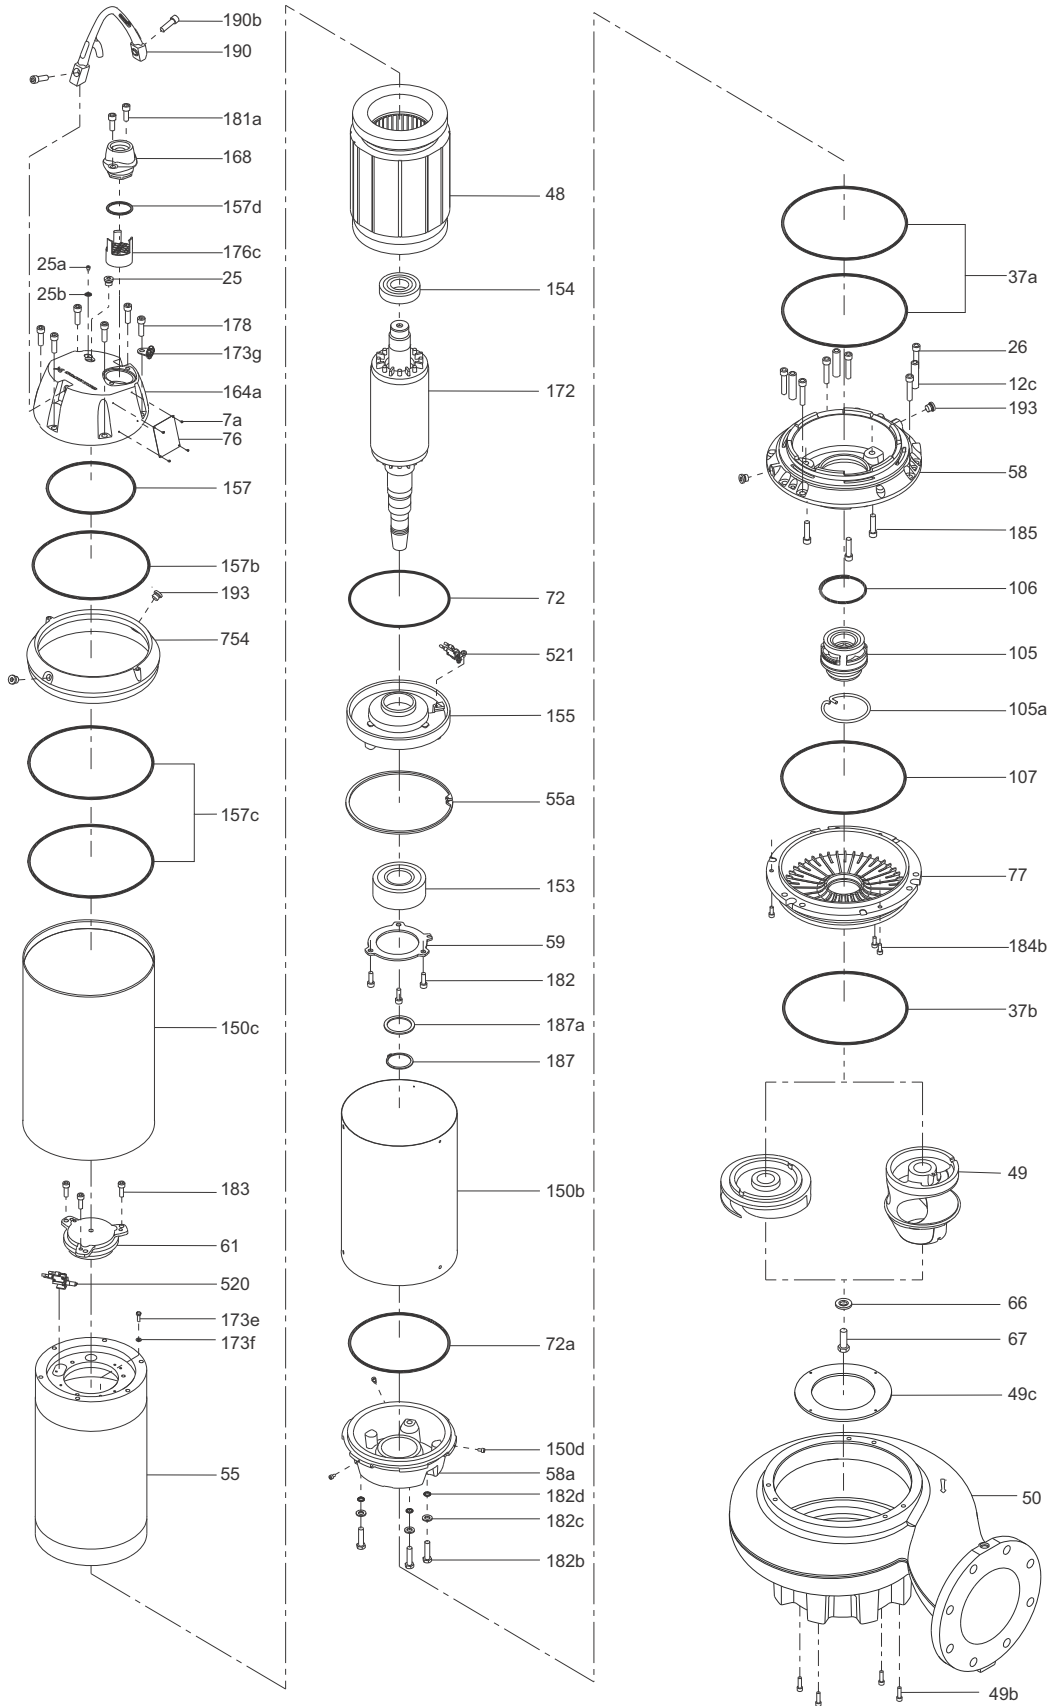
Exploded view, SE pump, explosion-proof version, 2- and 4-poles
